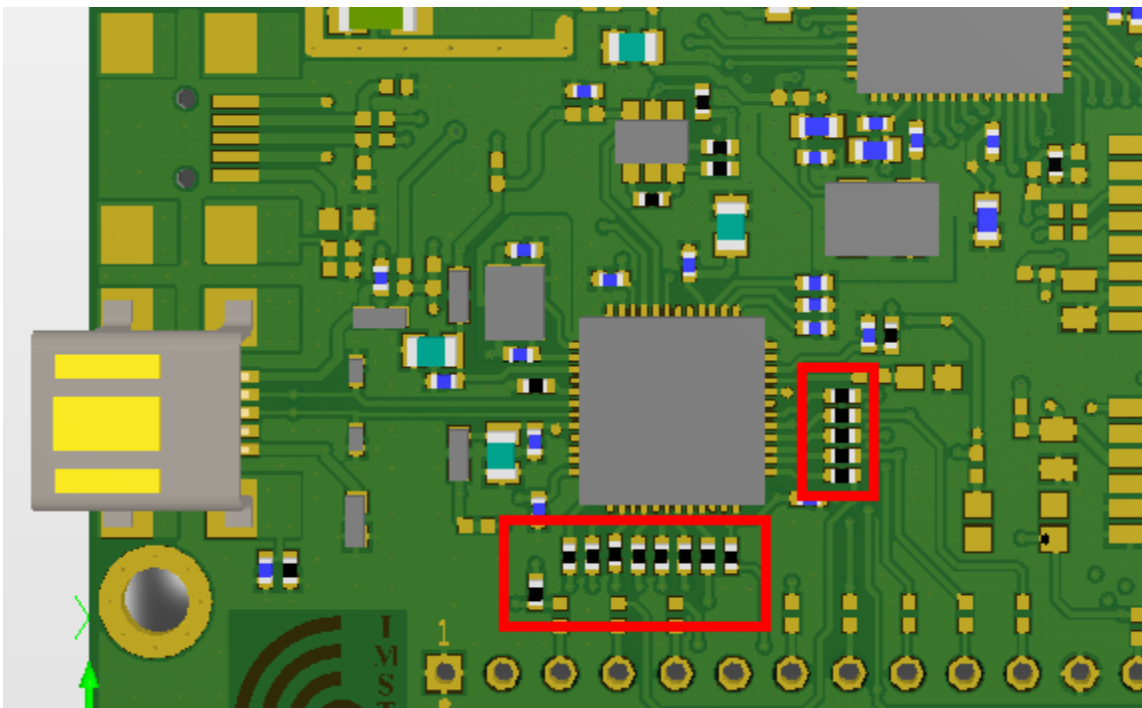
Top view of iC880A-USB with marked resistor to be removed
